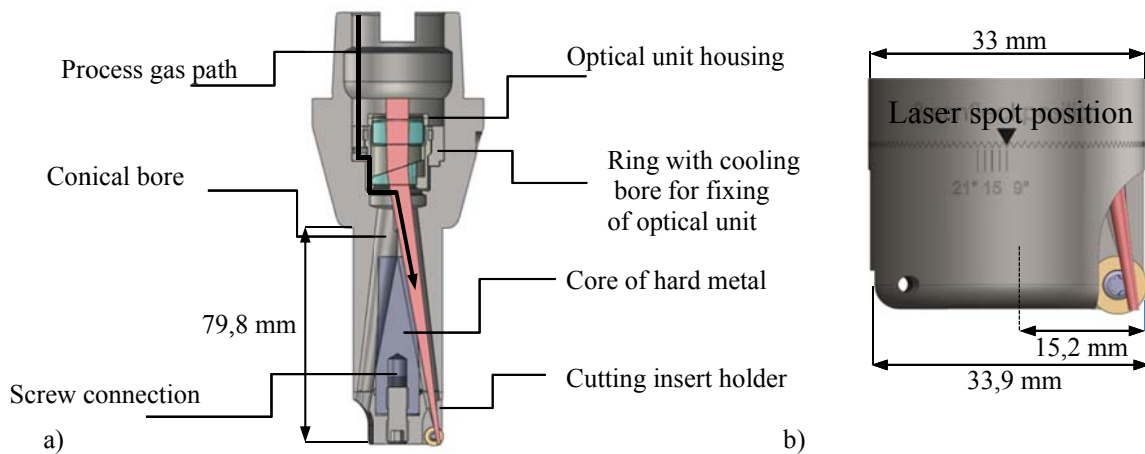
(a) Milling tool with integrated laser beam delivery and (b) cutting insert holder [67].
